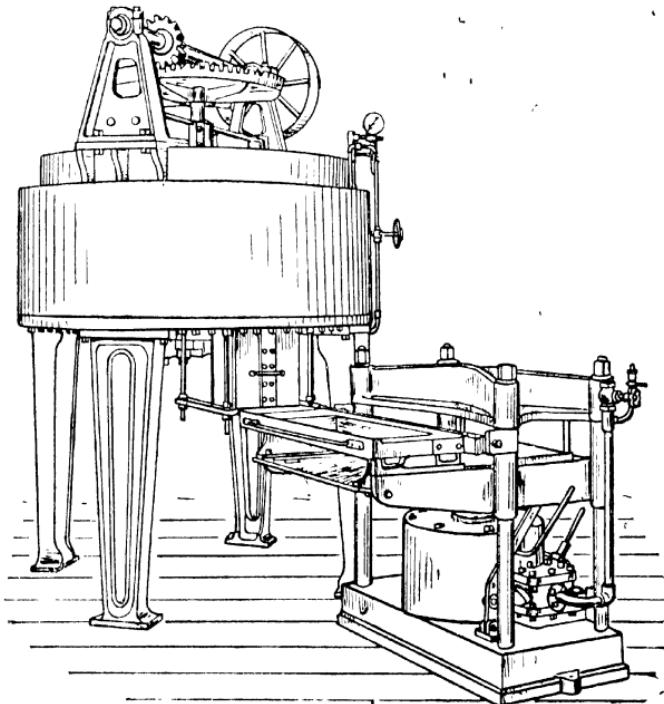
Kettle and Moulding Machine (Robert Middleton).
